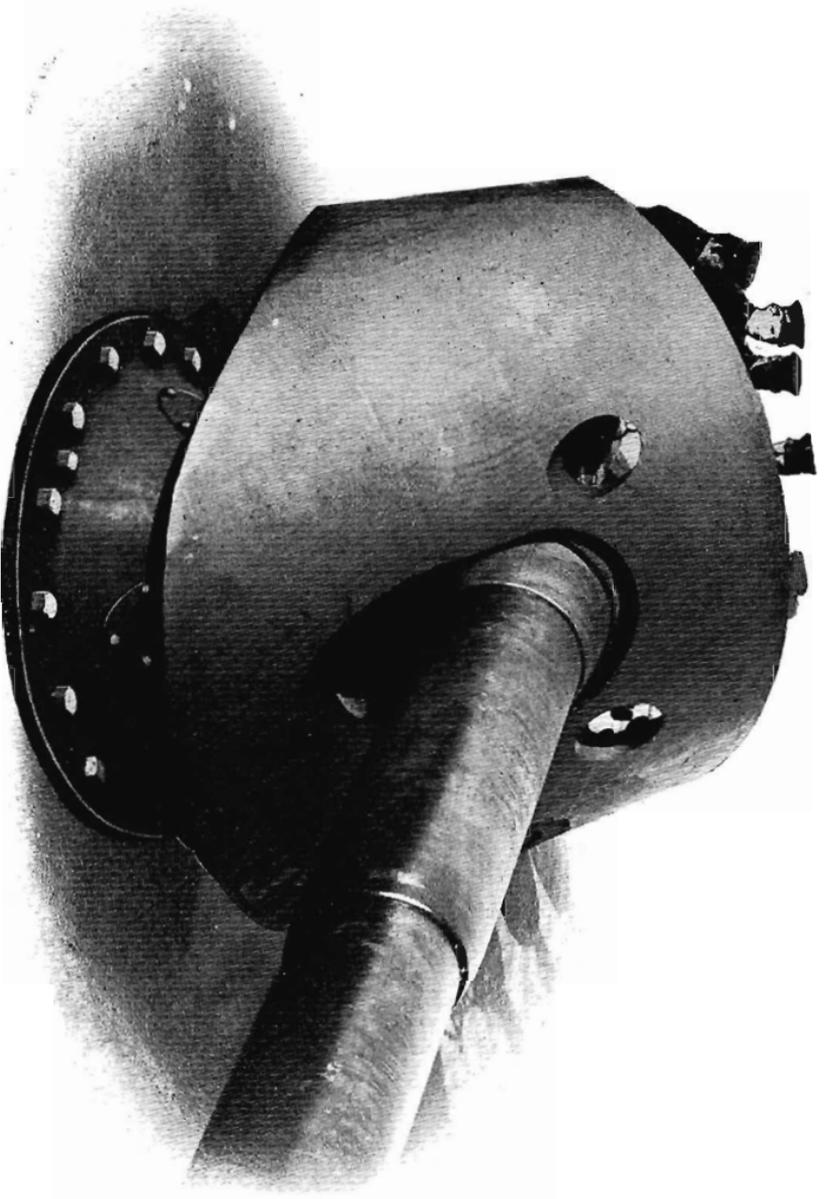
6-inch Gun on Pedestal Mount with Shield.
